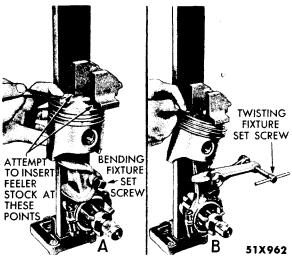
Checking Connecting Rod and Piston for Alignment
